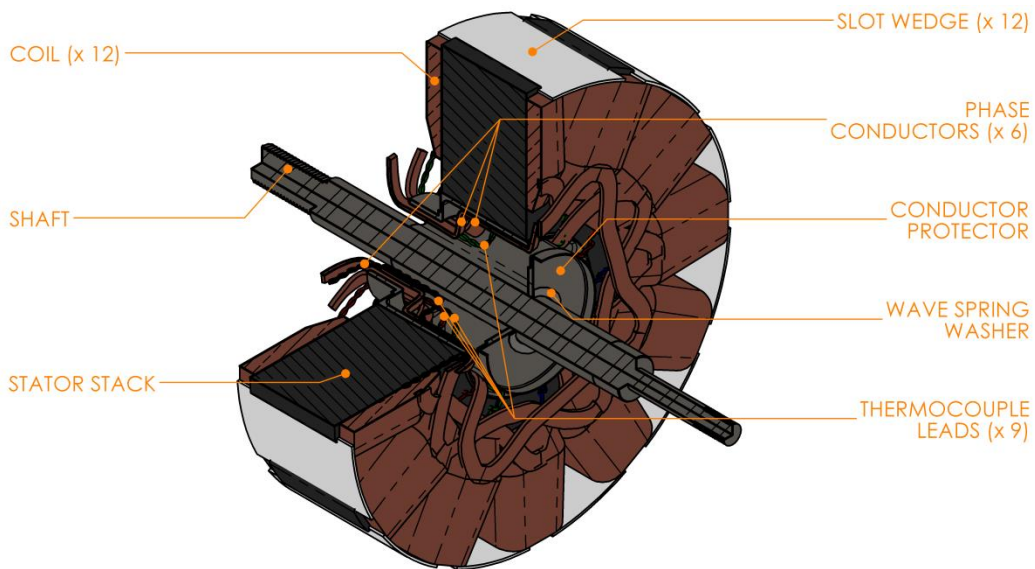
Stator assembly detail (12/16 CSR prototype)
